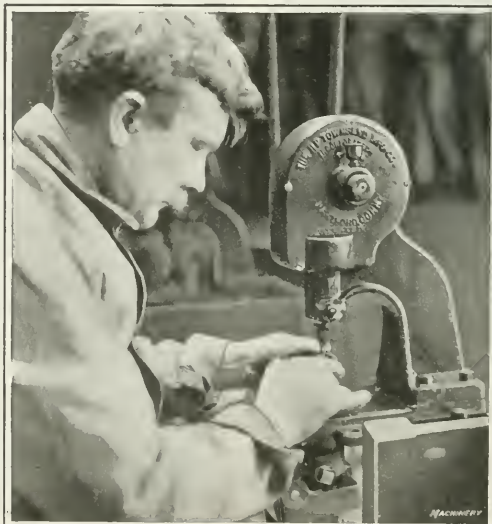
Heading Rivets in a Townsend Riveting Machine—Rivets hold Halves of Ball Bearing Retainer together
